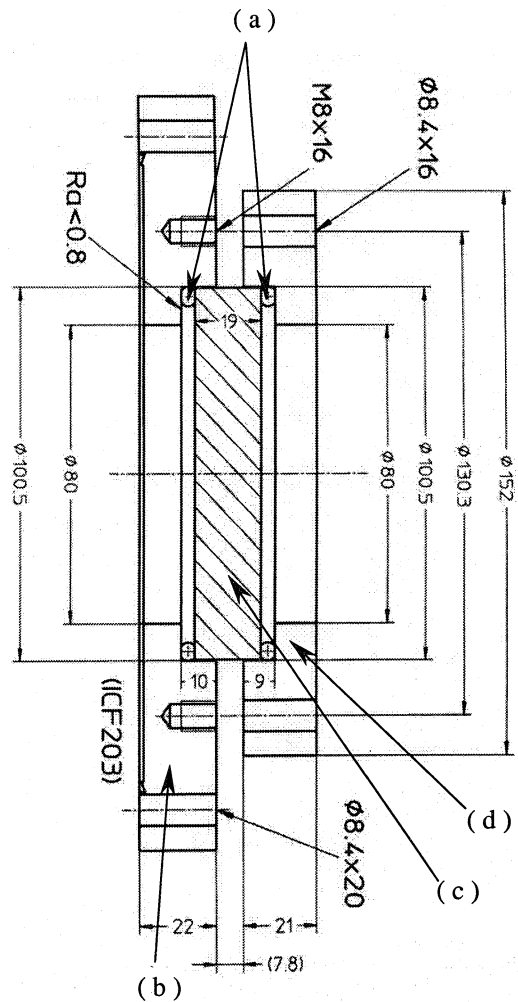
General design of the glass window. In this figure, (a): metal O-ring, (b): vacuum-side conflat flange, (c): optical glass flat, (d): air-side flange.
